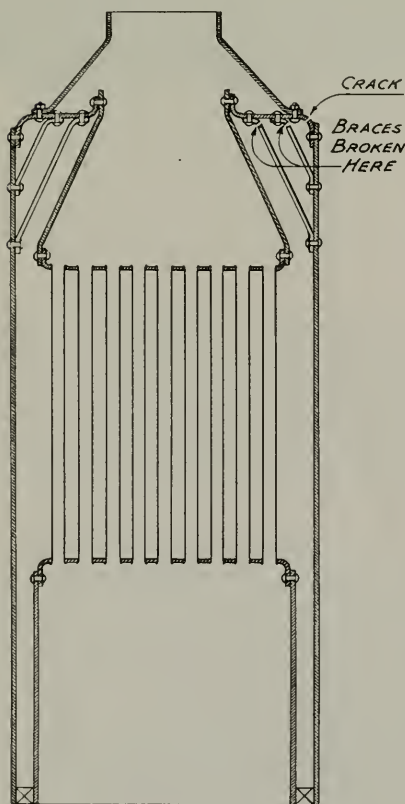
Three men were badly scalded when the top head of a small vertical tubular boiler, similar to the one drawn here, tore open at the flange along the line of a previous crack.
